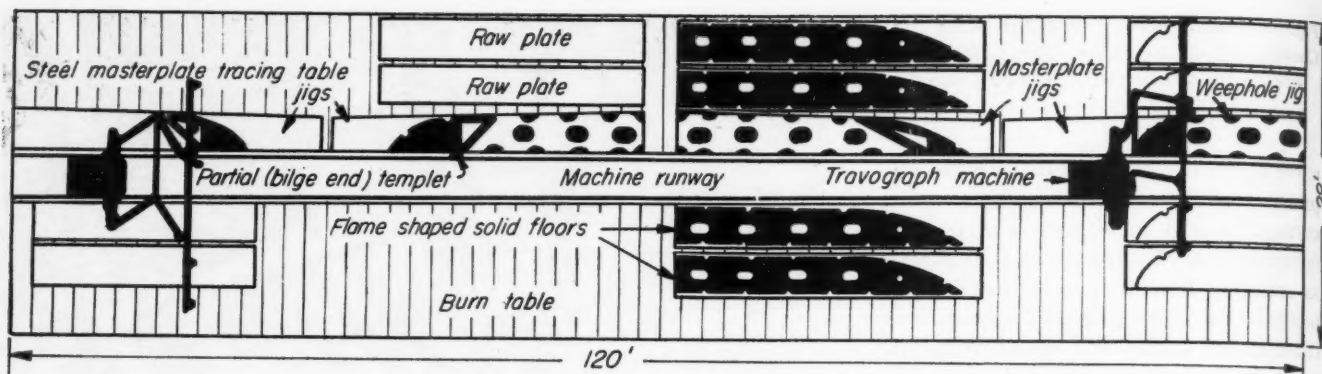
Above—Schematic layout of masterplate jigs, burn tables and runway of Travograph used in producing parts for Liberty ships
